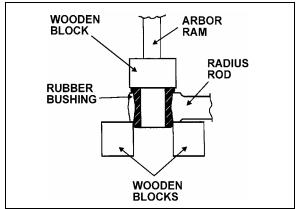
RADIUS ROD BUSHING INSTALLATION 16012
